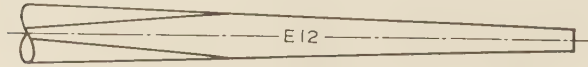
GROUP LETTER AND SERIAL NUMBER STAMPED ON FLAT SIDE OF TAPERED-SPRING END
